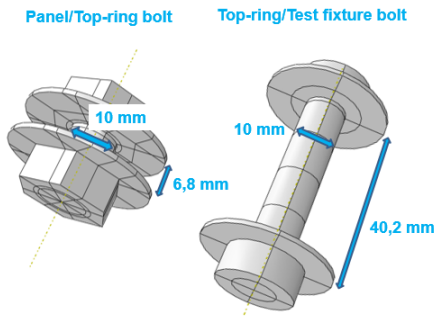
Geometry of the bolts connecting the panel to the top-ring and the top-ring to the test fixture.
